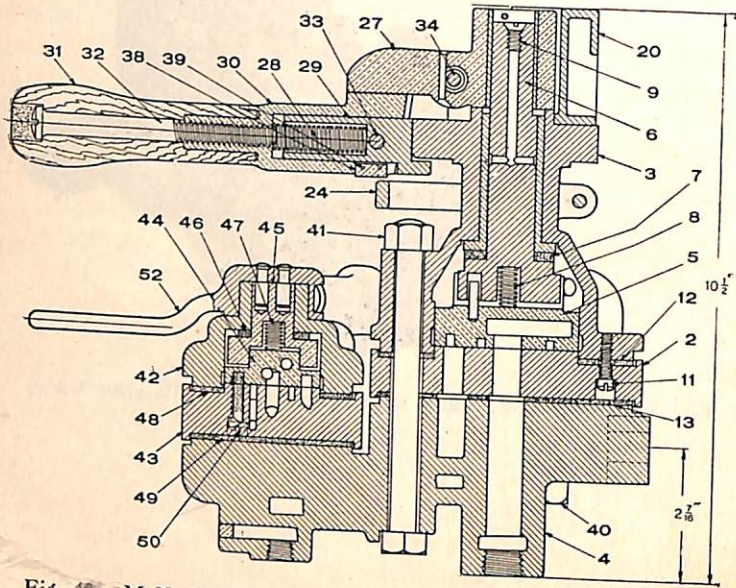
M-28 Brake Valve with Selector Valve, Sectional View
